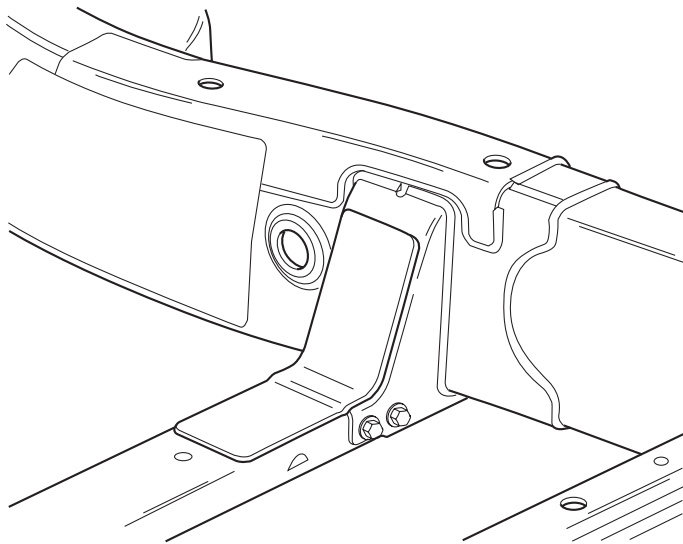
SELF ADHESIVE HEAT SHIELD (RH SIDE ONLY)
